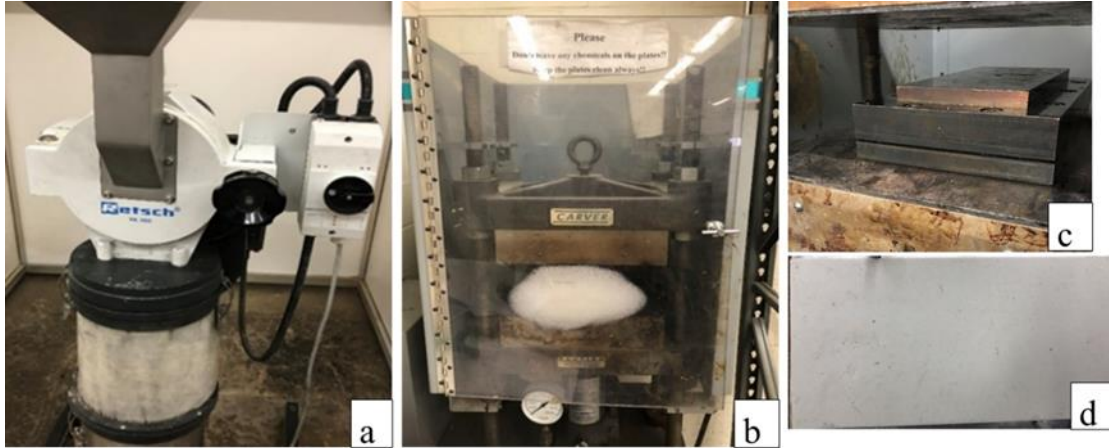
(a) Retsch Laboratory Mill, (b) hot press, (c) hot press mold, (d) hot-pressed plate
